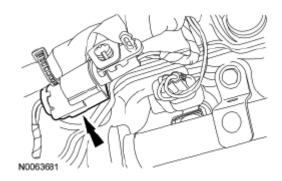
Locating Cylinder Head Temperature Sensor Electrical Connector Courtesy of FORD MOTOR CO.
